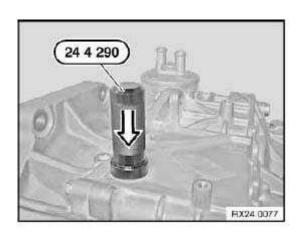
Identifying Special Tool (24 4 290) Courtesy of BMW OF NORTH AMERICA, INC.
